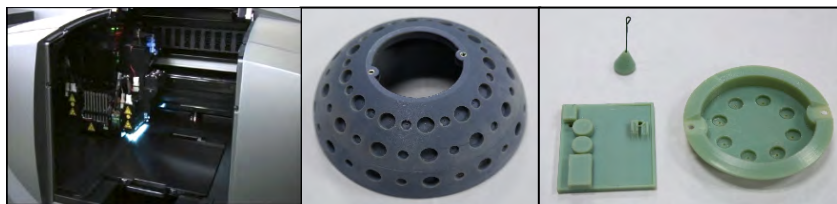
3D printer with 3D printed dome, cap, towers, and jig
